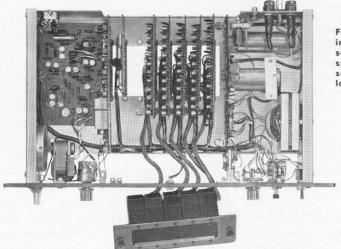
Interior view, showing NUMERIK Indicator assembly detached. The eight spare indicator lamps can be seen behind the panel to the left of the NUMERIK assembly.
